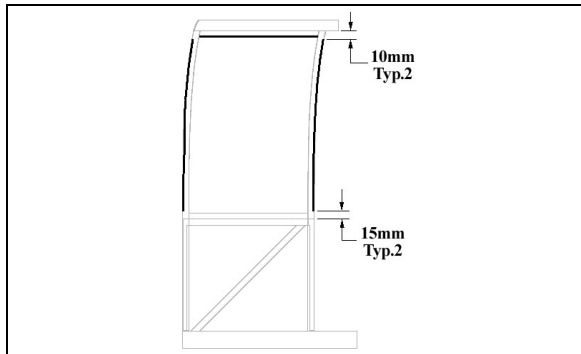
SIDE FIXED WINDOW – 1/4 X 1/2 DOUBLE FACE ADHESIVE TAPE INSTALLATION
